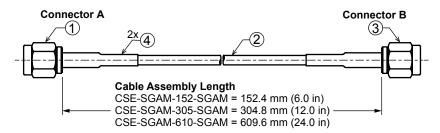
Product Dimensions for the CSE-SGAM-ccc-SGAM Cable Assembly
